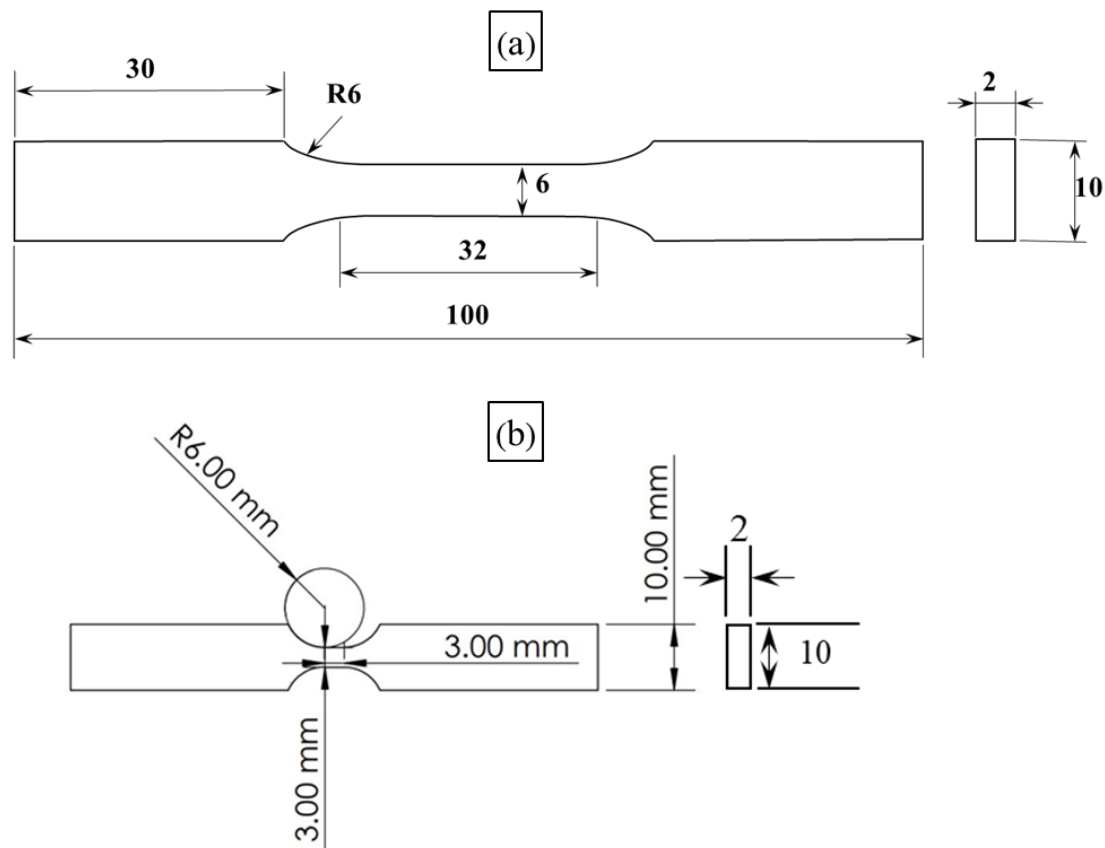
(a) Design of full-length tensile specimen with dimensions; (b) design of reduced-section tensile specimen with dimensions
